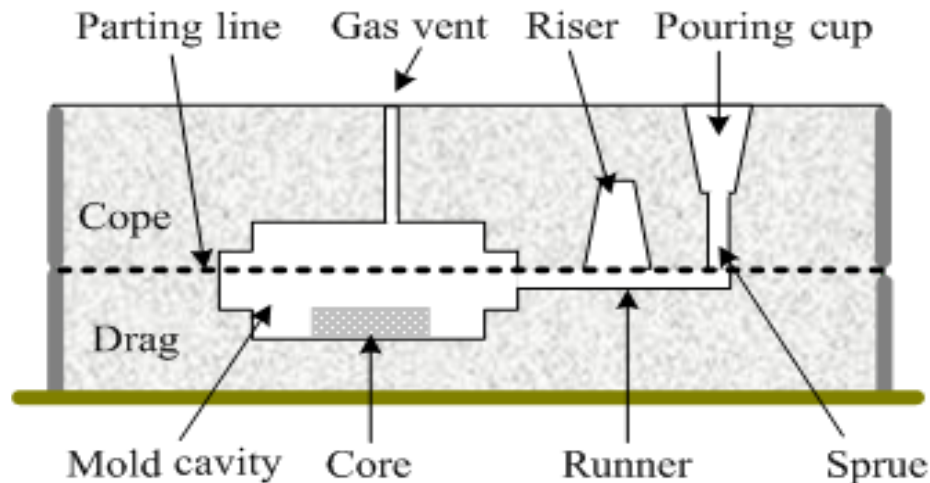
Schematic set-up of sand molding / casting process [11]
